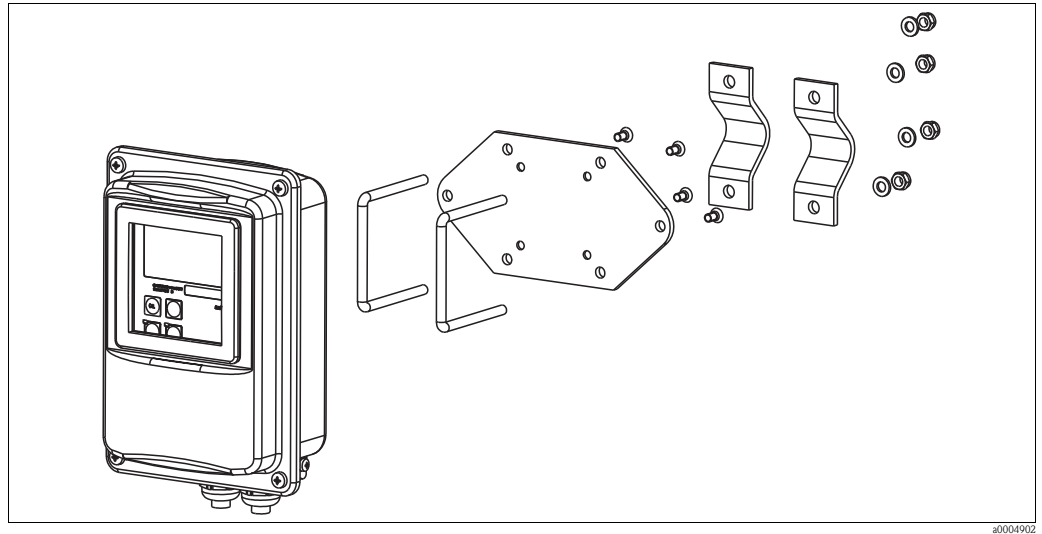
Mounting kit for installing the CLD134 separate version on posts
